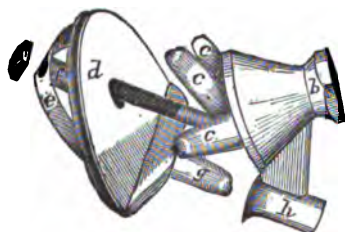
THE SCHIER ATOMIZER: nozzle and distributor disconnected.
